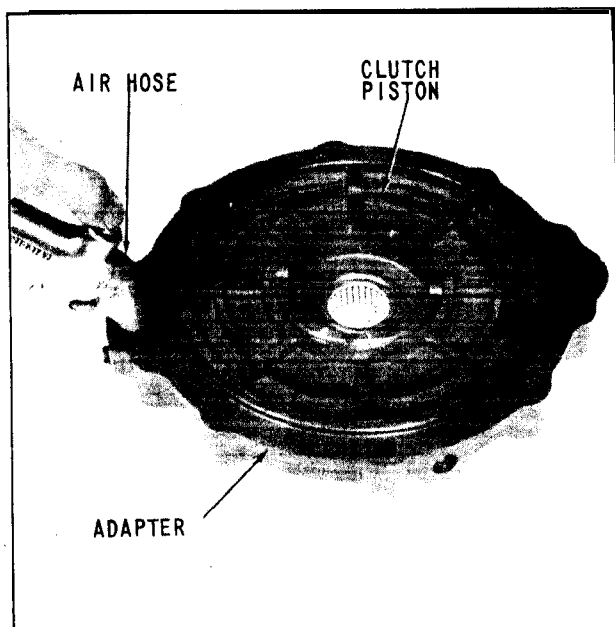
Disassembling Reverse Clutch Piston in Adapter
